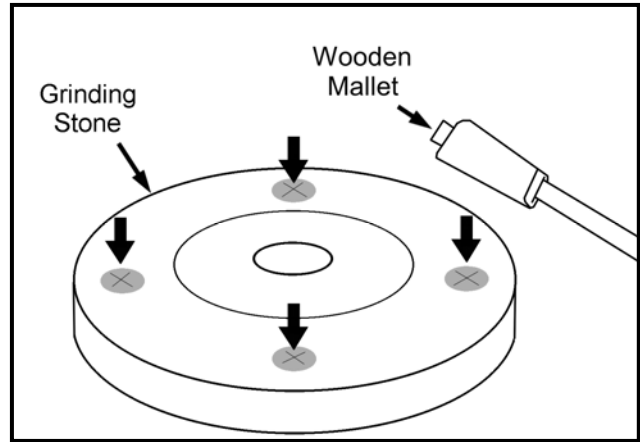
Tapping locations on the grinding stone when inspecting for internal damage
